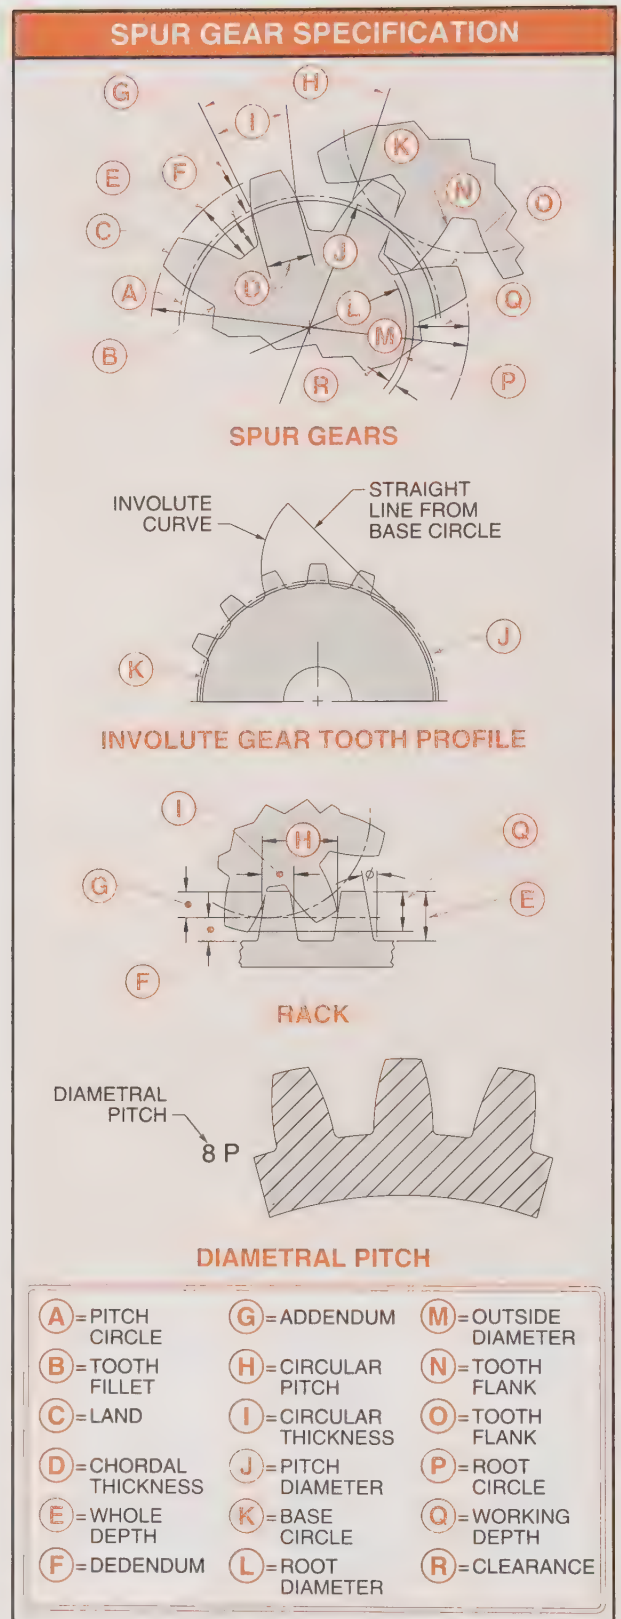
Gears are specified on prints using American Gear Manufacturers Association standards.
